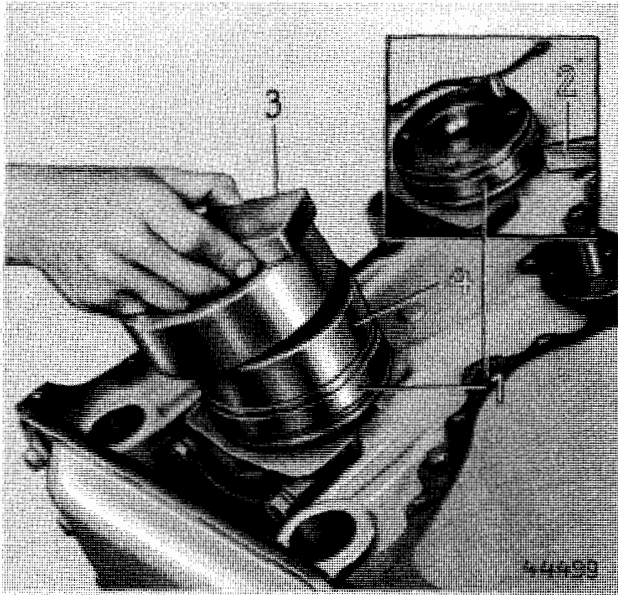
Removing Old Wear Ring-Pressing on New Wear Ring, Using Special Tools No. JD 251 and JD 251-3
